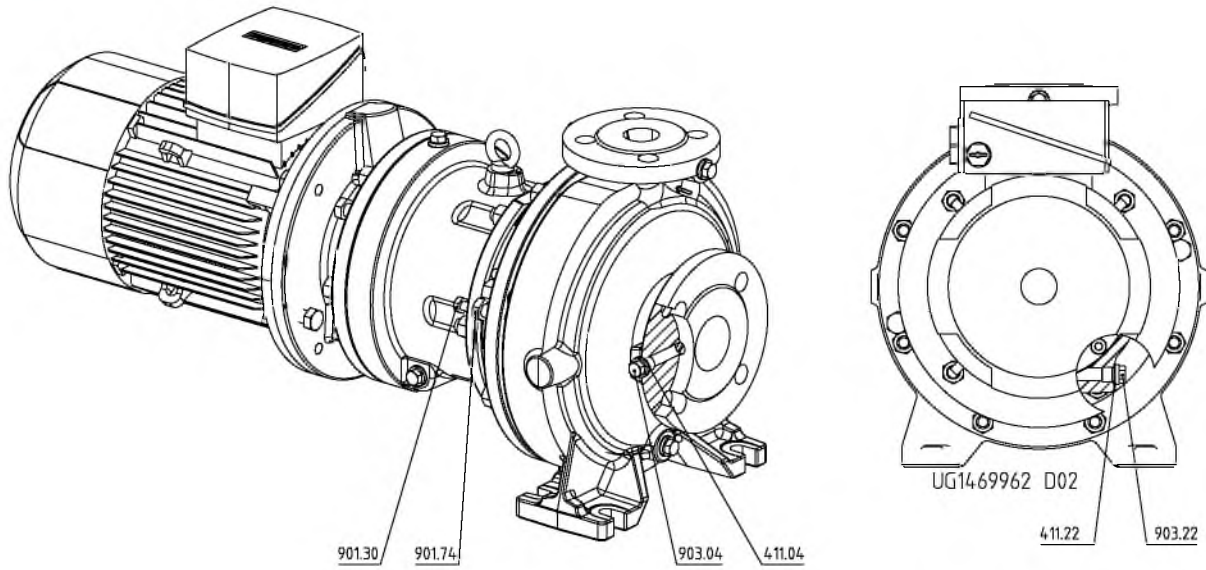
Fitting the discharge cover on the pump casing on designs with bolted cover
